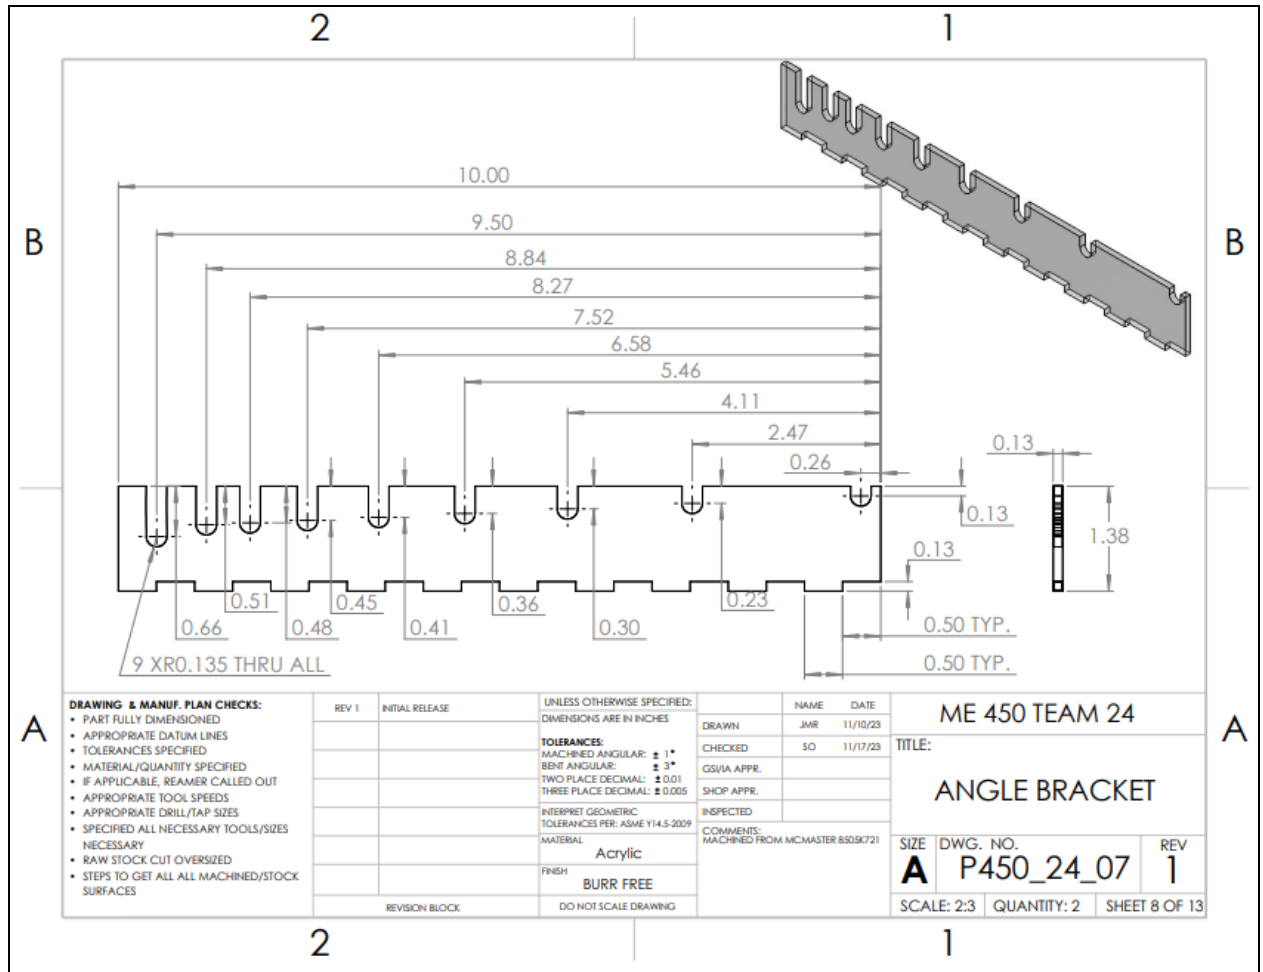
Manufacturing drawing for the angle bracket components of the beta design.
